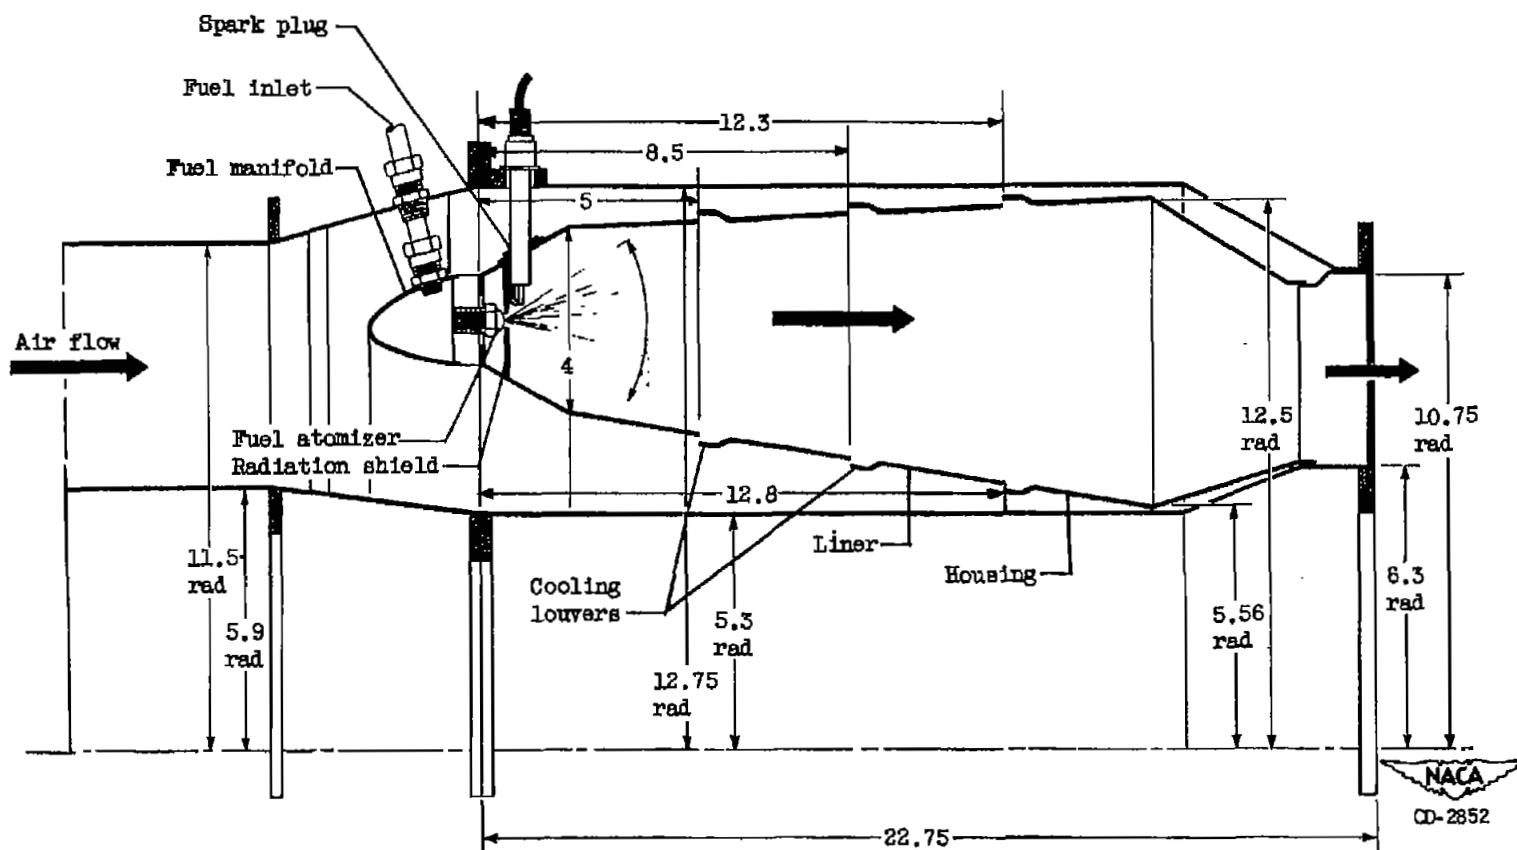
Longitudinal cross-sectional view of model 13 combustor and housing. (Dimensions are in inches.)
